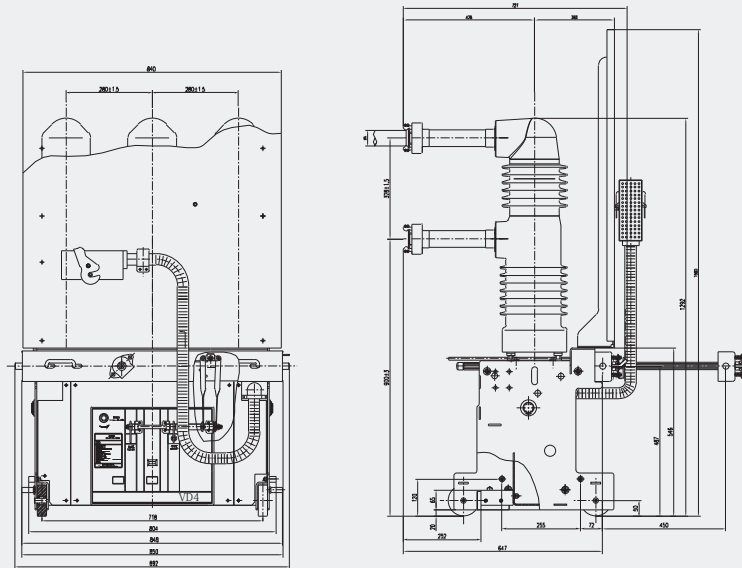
/1 Withdrawable Vacuum Circuit Breaker Outside View
